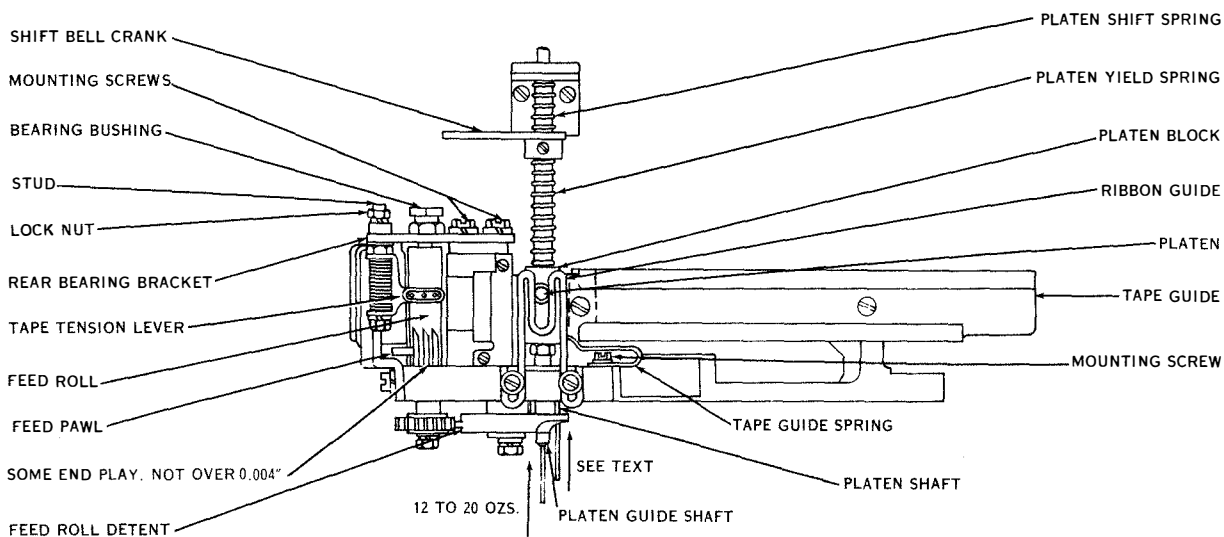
Feed Roll Bearings and Platen Shift and Yield Spring Tensions
